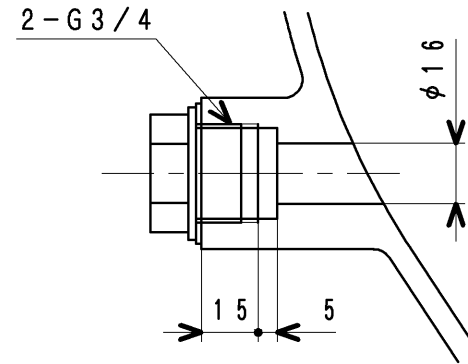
DETAIL OF OIL PRESS. GAUGE & PRESS. SWITCH ADAPTER
